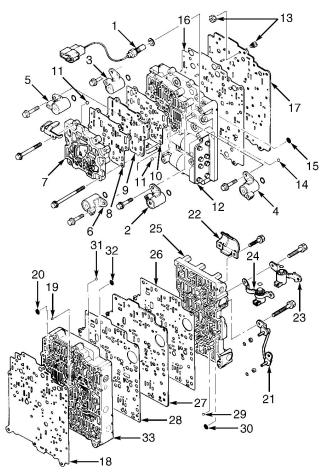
Exploded View Of Valve Body Assembly (FA4A-EL) Courtesy of MAZDA MOTORS CORP.
